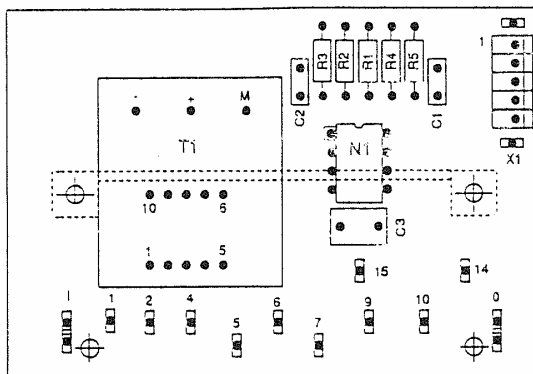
Transformer board A7, Ref. No. 029.138 493
